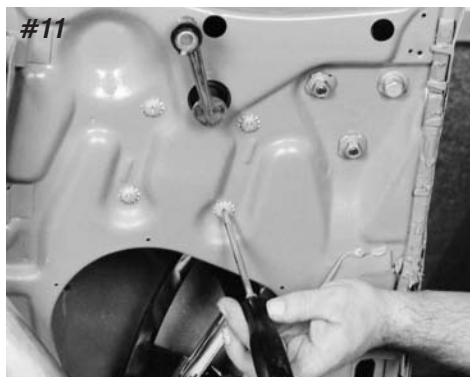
& 11: Lubricate the quarter window regulator with some white lithium grease. You will want to lubricate the spring, the gears, and any of the parts that come in
